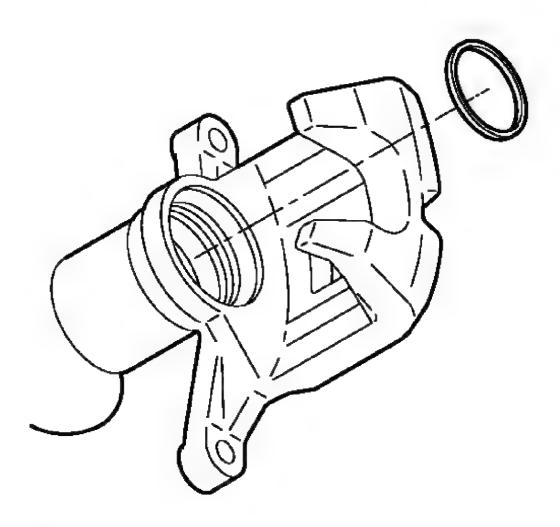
View Of Piston Seal Courtesy of GENERAL MOTORS CORP.
